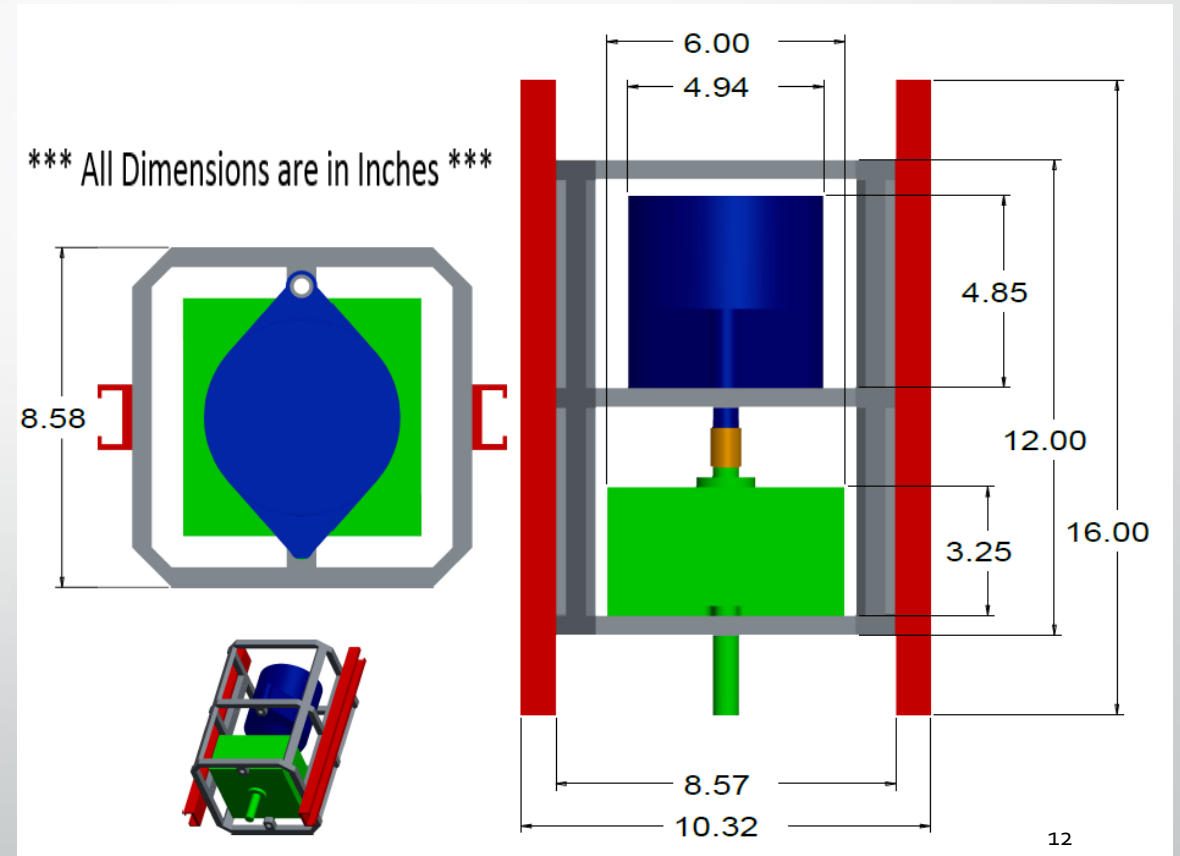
Hydroelectric Generator Cross-Sectional View with Dimensions
